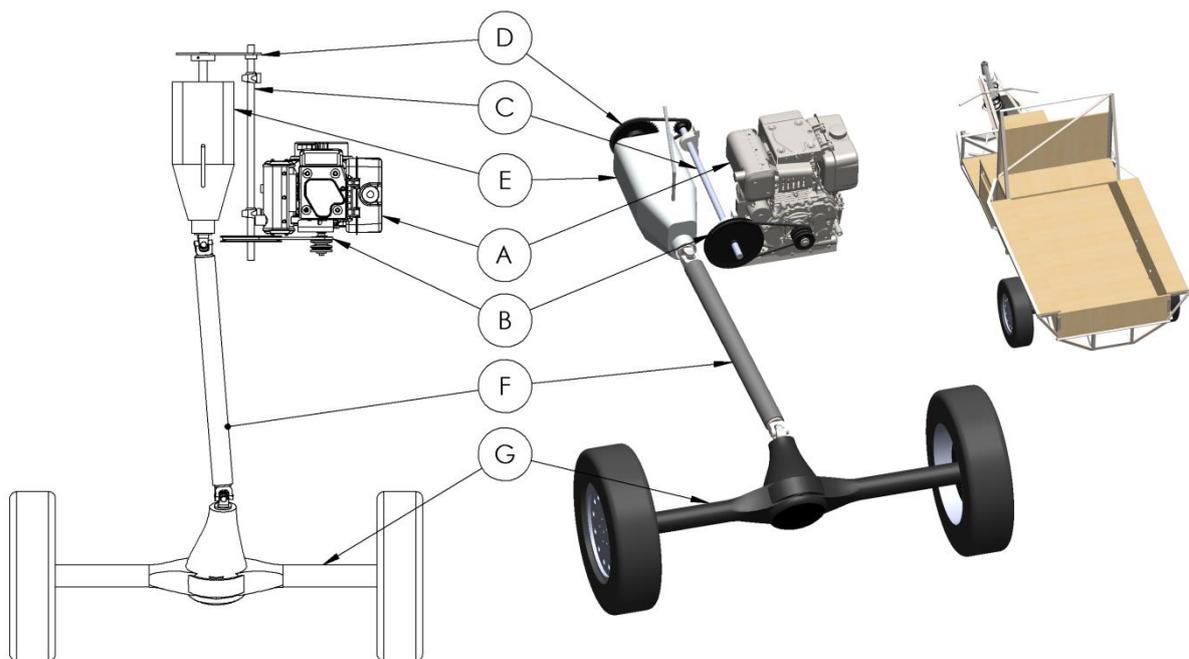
The PUP driveline: engine (A), belt-pulley reduction/clutch (B), jack shaft (C), chain-sprocket reduction (D), RWD transmission gearbox (E), drive shaft (F), and rear differential (G)
